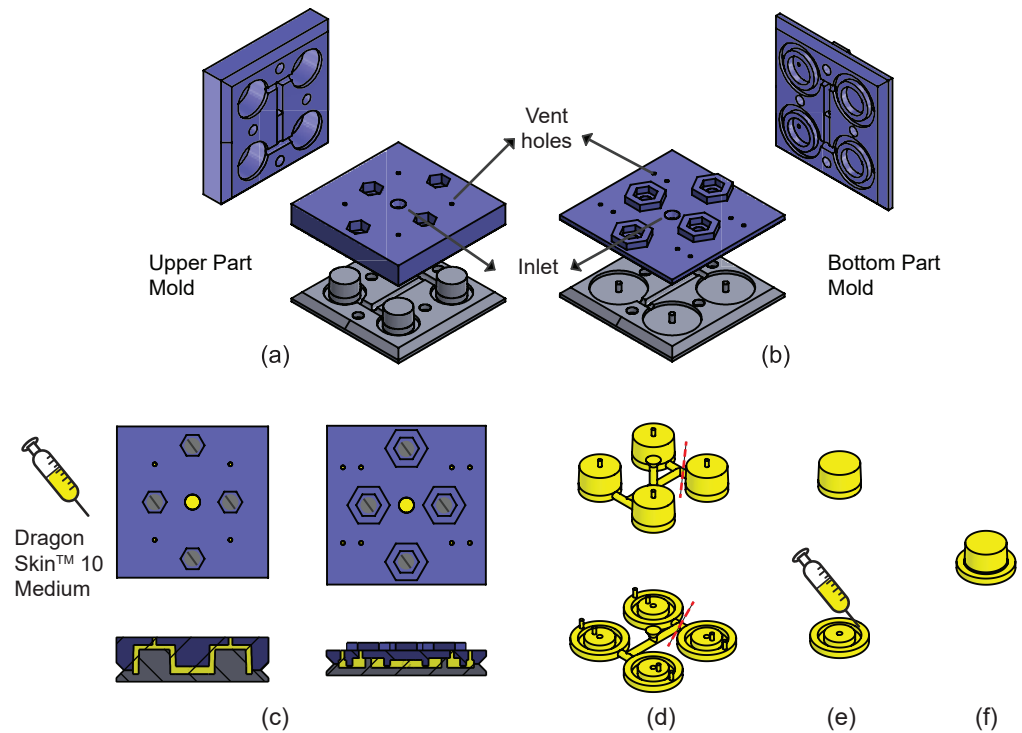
Fabrication steps of Pneumatic Unit Cells (PUC): (a) Mold used for the fabrication of the upper part of the PUC. (b) Mold used for the fabrication of the bottom part of the PUC. (c) Top view and cross-section view of the mold assembly. Injection of Dragon Skin™ 10 Medium into the molds through the inlets. (d) The extracted upper and bottom parts of PUCs from their respective molds. (e) Gluing of the upper and bottom parts of the PUC using Dragon Skin™ 10 Medium. (f) Fully assembled PUC.
